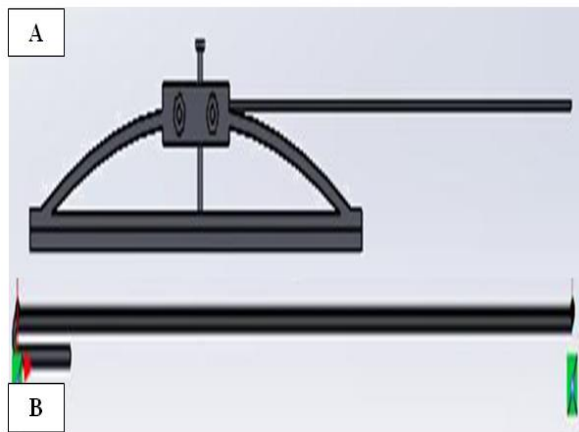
(A) Assembled front view of the proposed wiper (B) Front view of wiper arm
